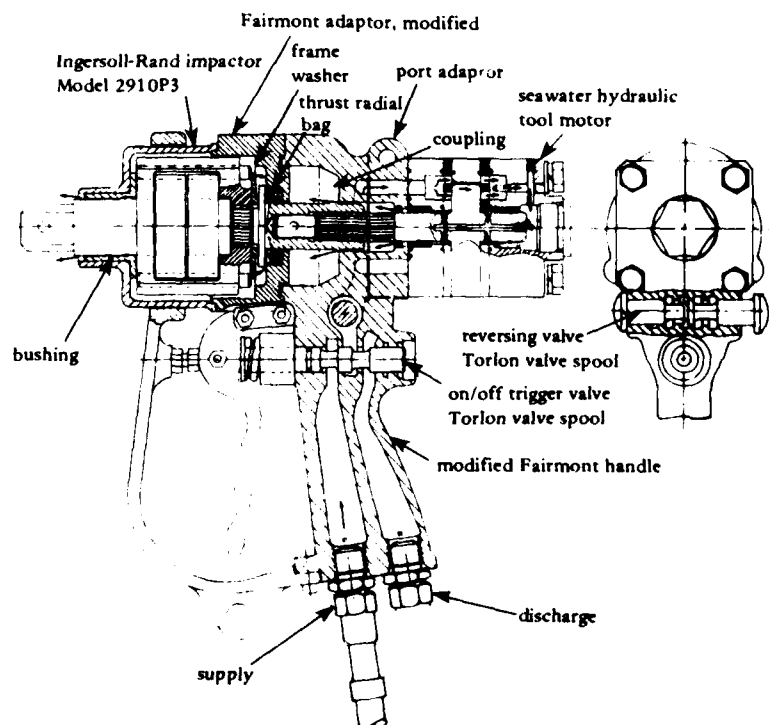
Impact wrench showing seawater fluid path for bearing lubrication within the impact mechanism.
